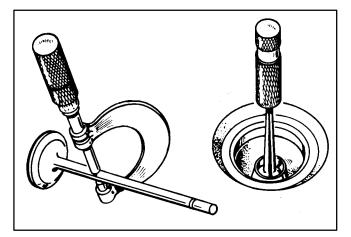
VALVE STEM AND VALVE GUIDE BORE DIAMETERS
